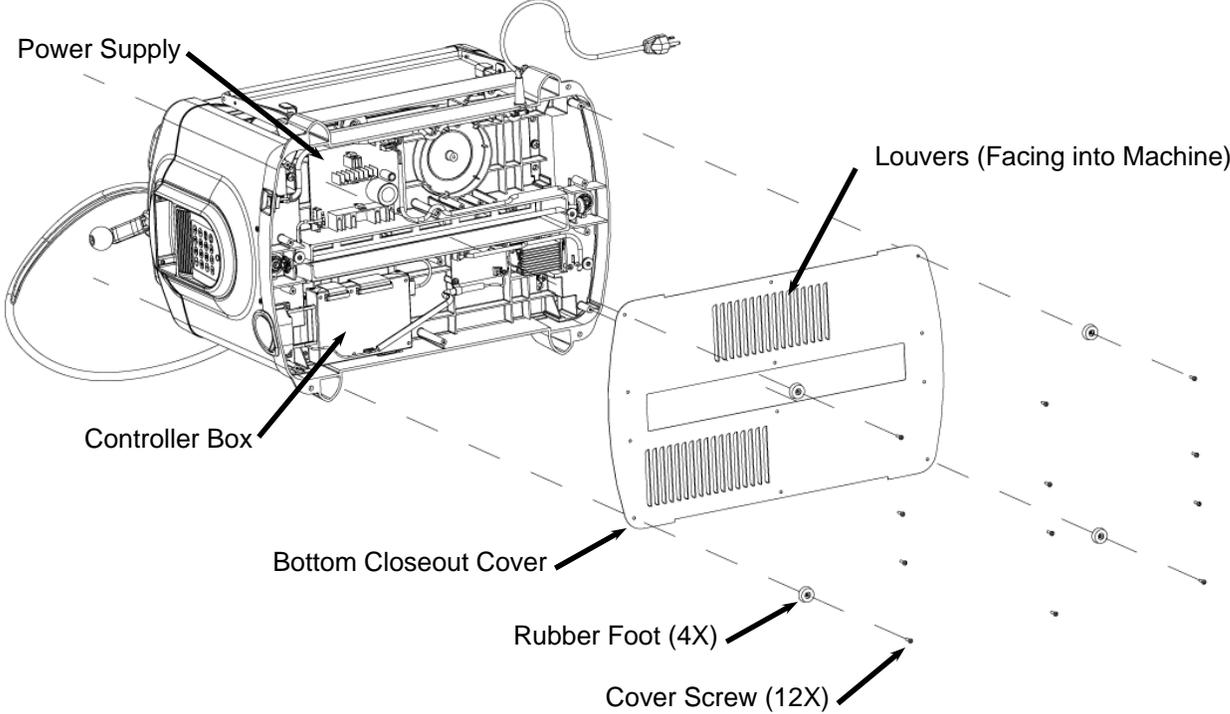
REMOVAL OF THE BOTTOM COVER
